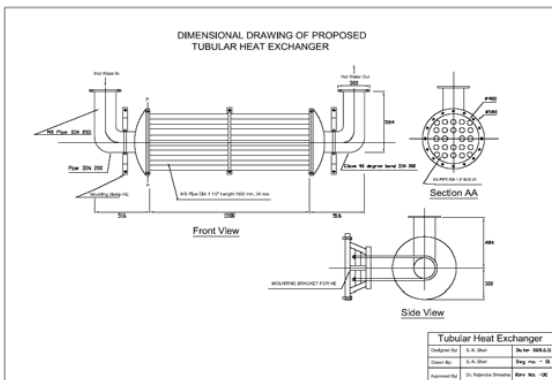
Dimensional Drawing of Tubular Heat Exchanger
